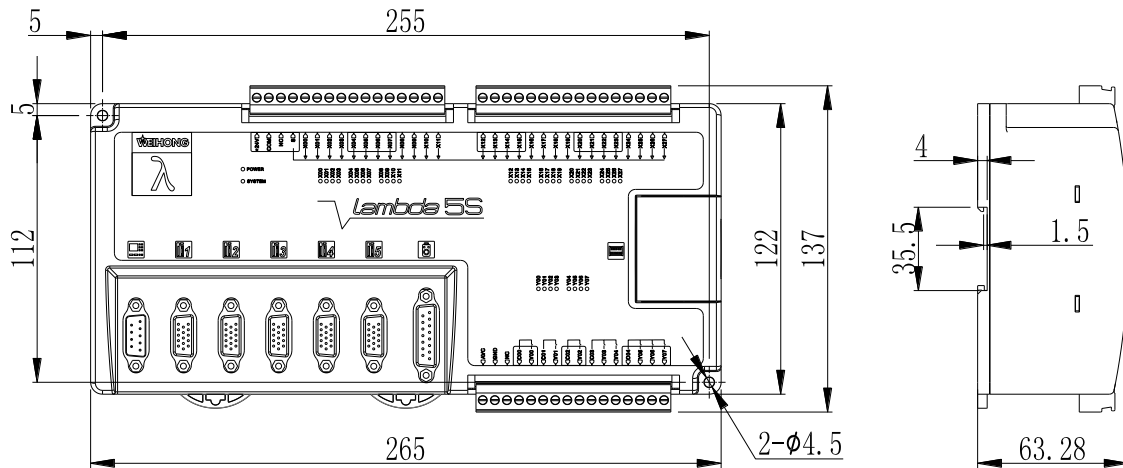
Dimensional drawing of Lambda 5S controller
